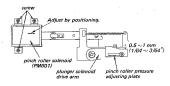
Pinch roller solenoid (PM601) position adjustment
